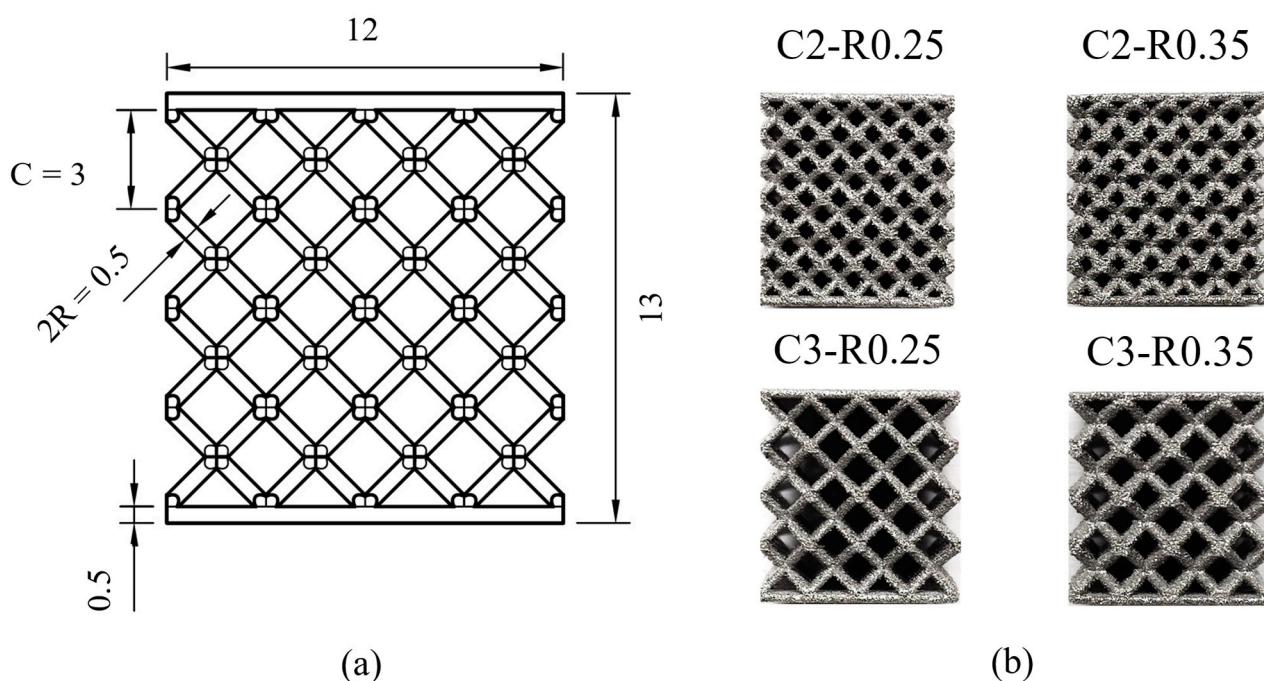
Samples for compression tests: (a) 2D sketch with dimensions of front view of C3-R0.25 cell configuration. All units are expressed in mm. (b) Picture of 3D-printed samples.
